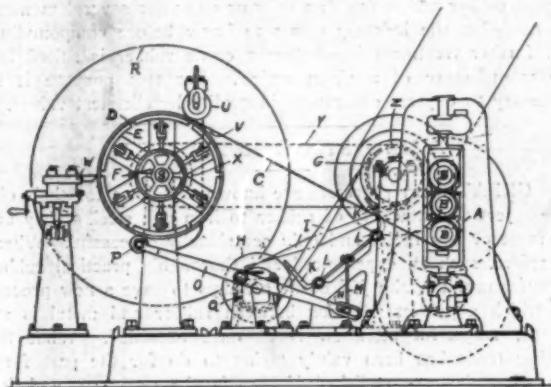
SIDE ELEVATION OF BRIDGE TIRE MACHINE.
